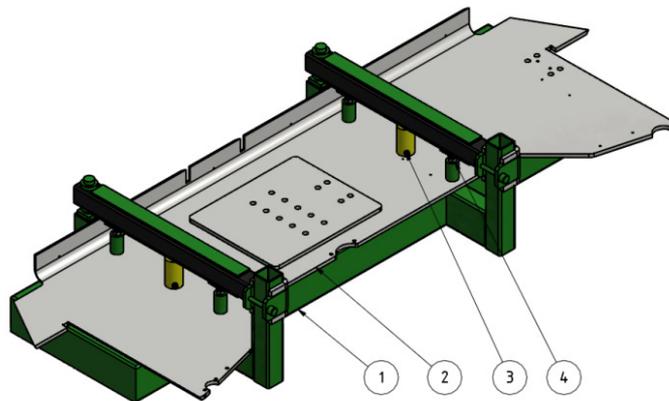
Overview of breaking jig: 1 – breaking jig; 2 – plane; 3 – cylinder; 4 – tensioner
